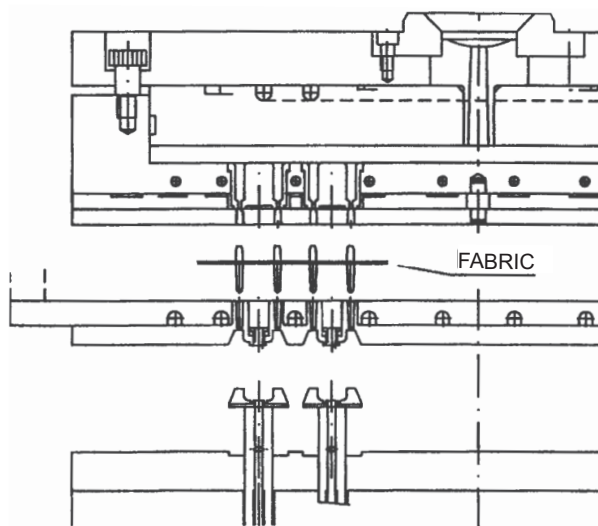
Open cold transfer mold showing fabric that captures sprues
